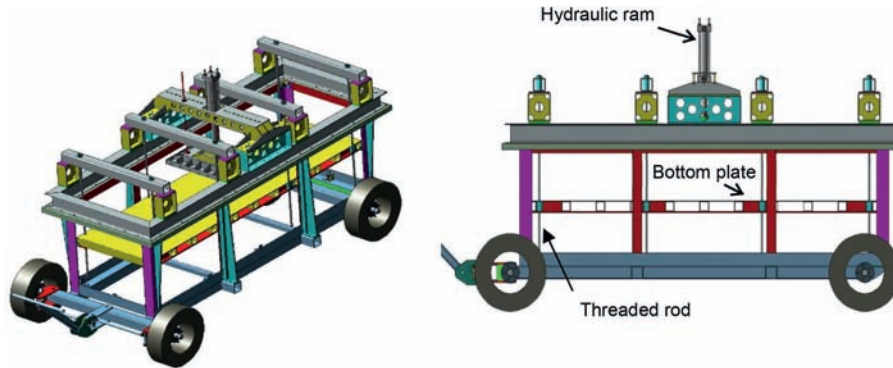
Computer aided design (CAD) images of the testing assembly.
